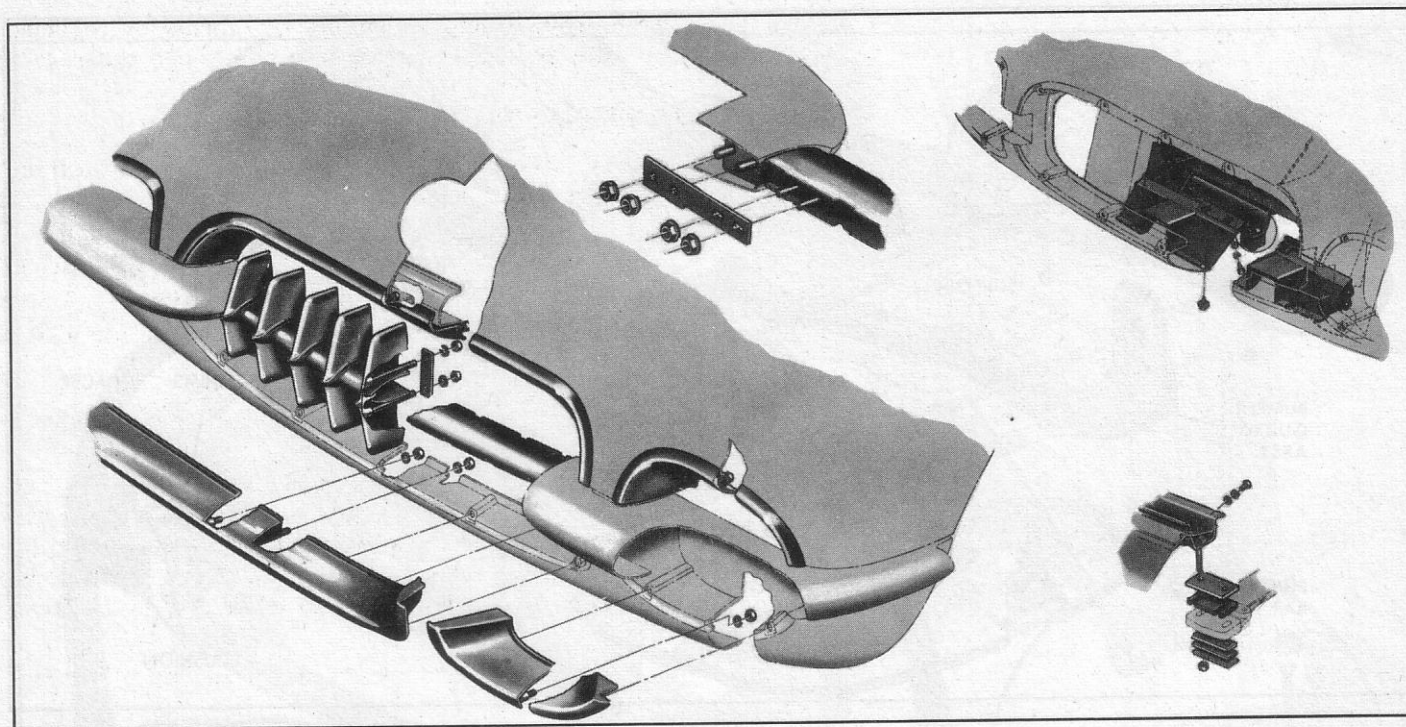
Bumper Disassembly and Front End Body Adjustment
